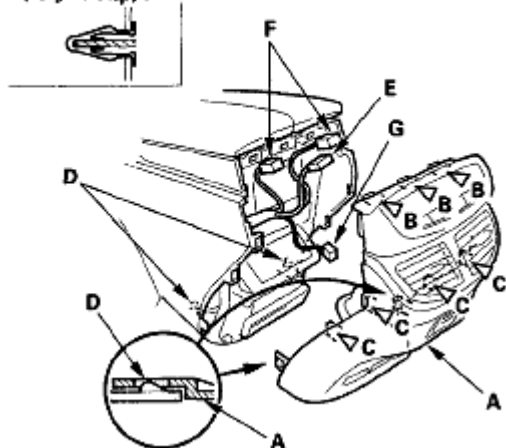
Identifying Accessory Power Socket Connector, Clips And Lower Tabs
